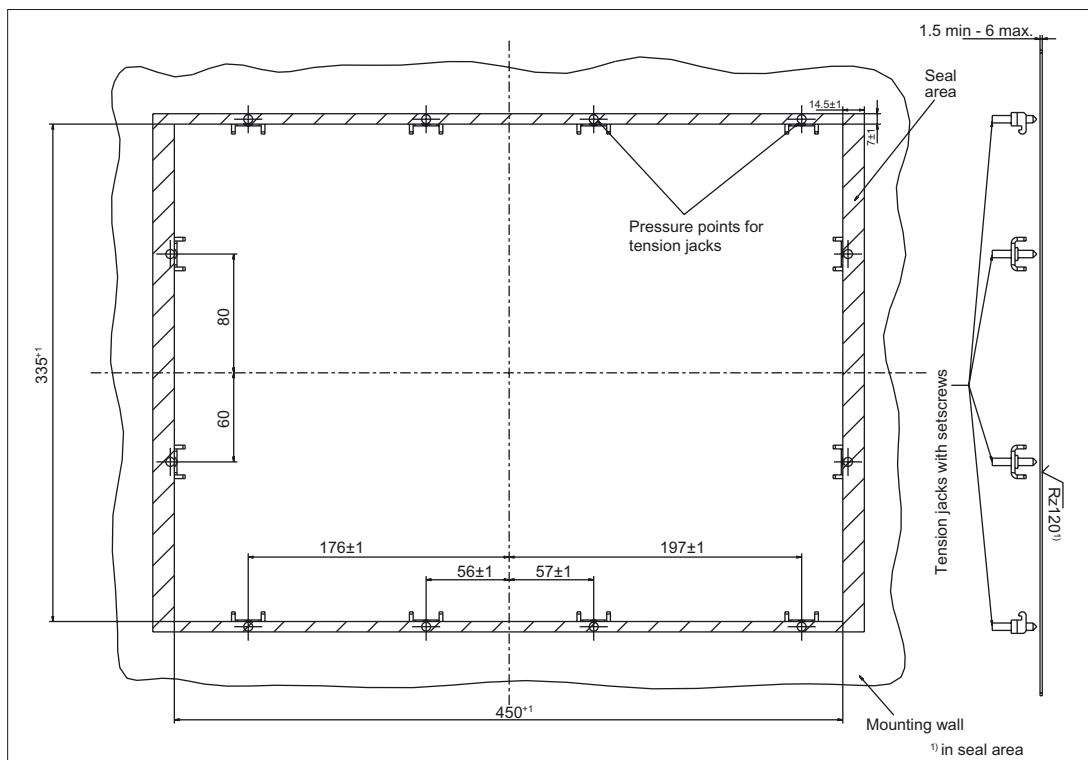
Dimension sheet for mounting the TP 015A operator panel front
